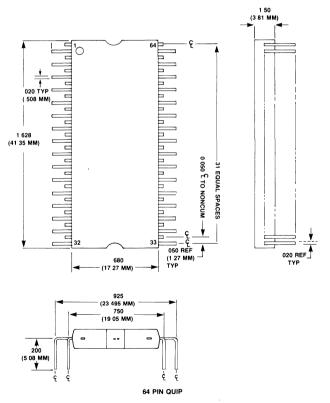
64 PIN QUIP Dimensional Outline
